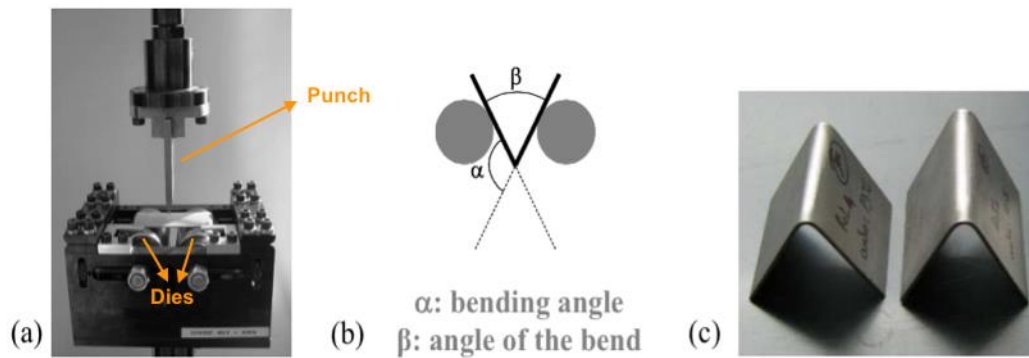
Illustration of the a) air-bending device, b) bending angle, c) sheet sample after bending test [2].
